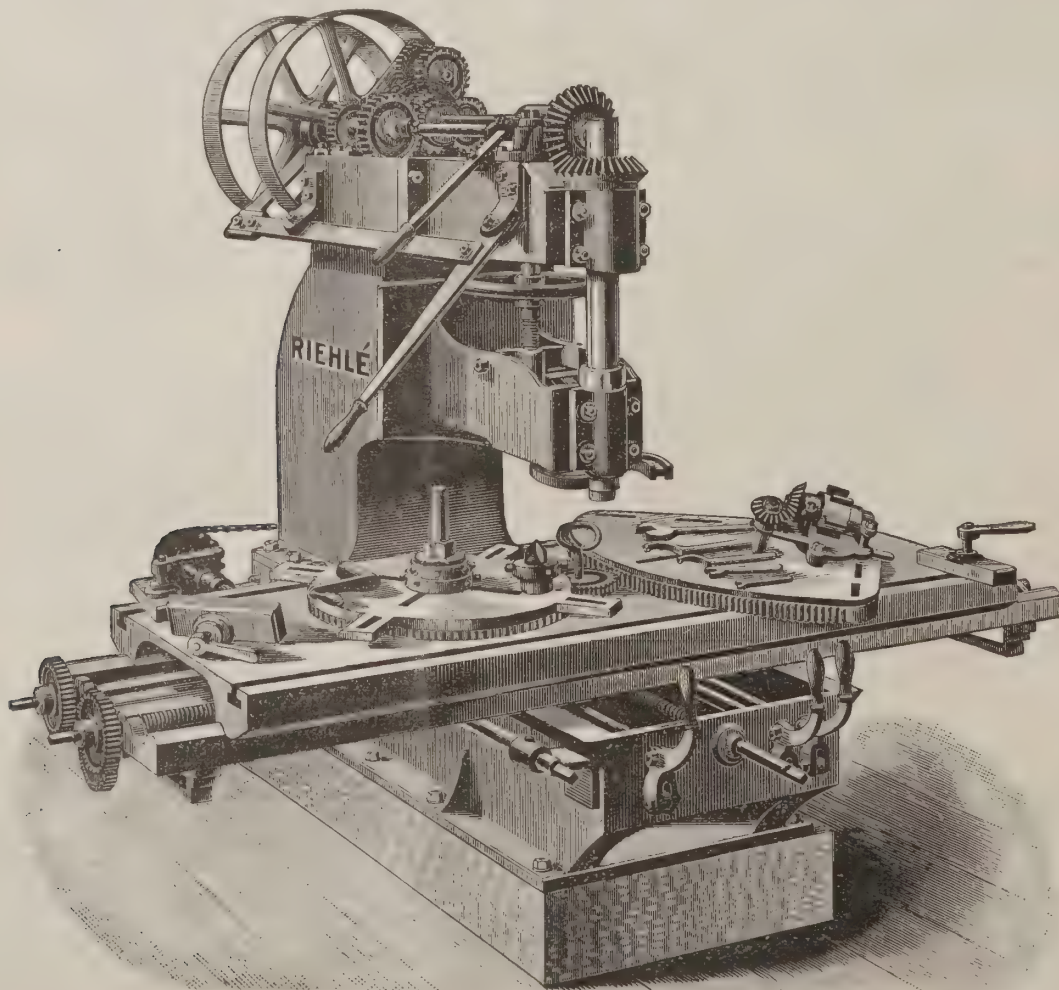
RIEHLE MARBLE MOULDING MACHINE.
